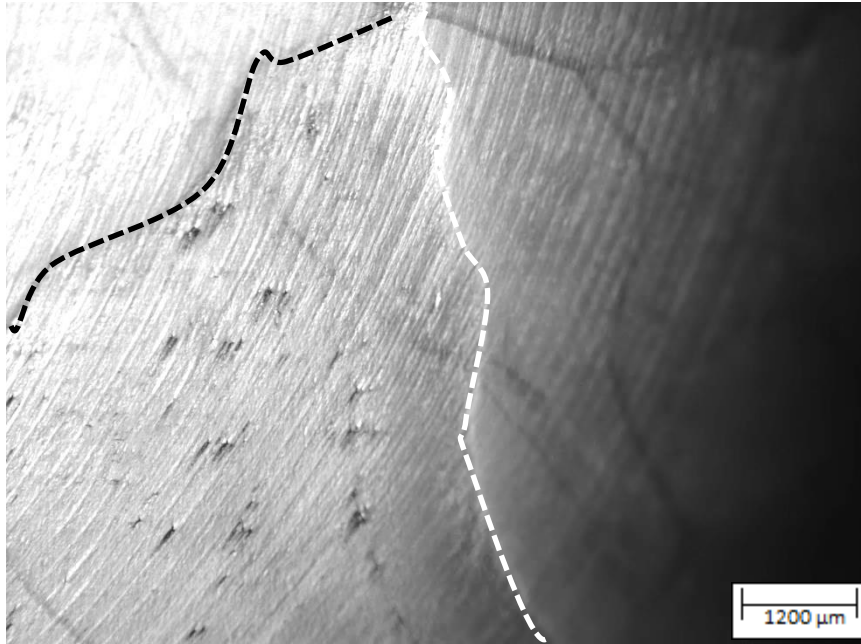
Stereoscopic image of the tensile surface of the bend test (See Figure 41) of sample 3 showing sub-millimetre defects adjacent to the original fusion line. Original fusion line is demarcated but the dotted line on the right with original weld metal on the right of this line. The dotted line on the left demarcates the experimental repair weld and the material in the top left side of the image is the experimental welds' weld metal.
